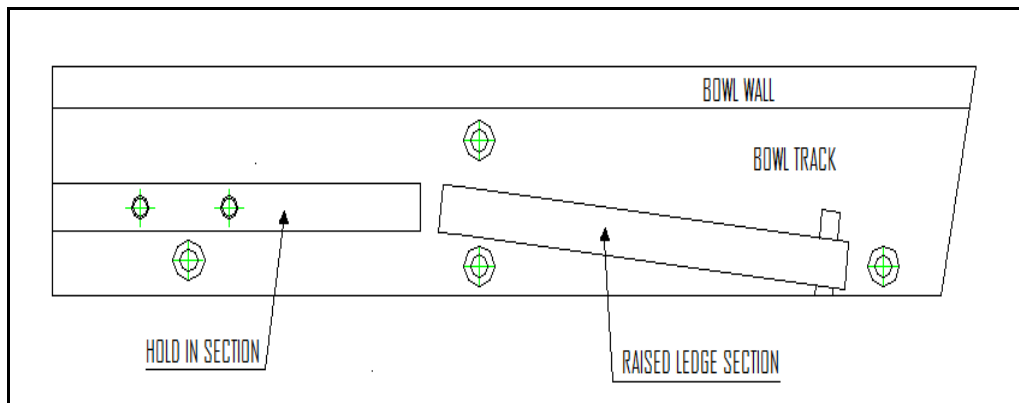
Plan View of the Automated Edge Riser Tool
